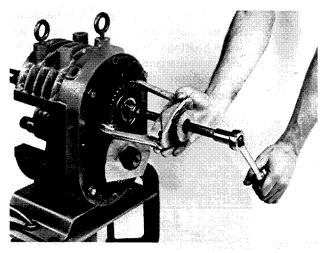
USING PULLER TO REMOVE TIMING GEAR
